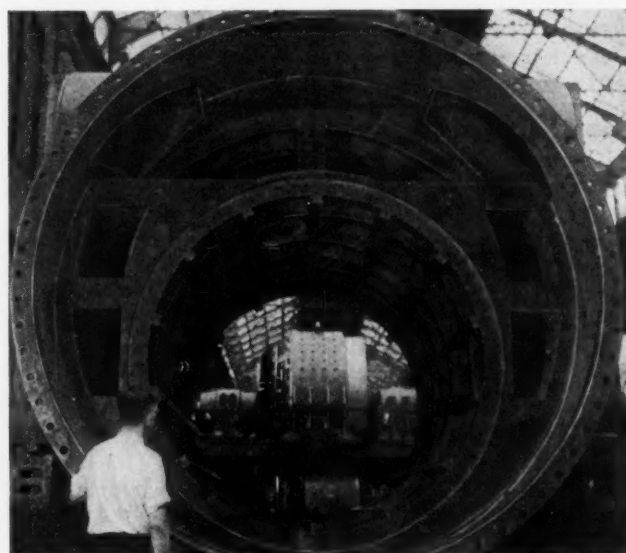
FRAME FOR TURBINE-DRIVEN GENERATOR
